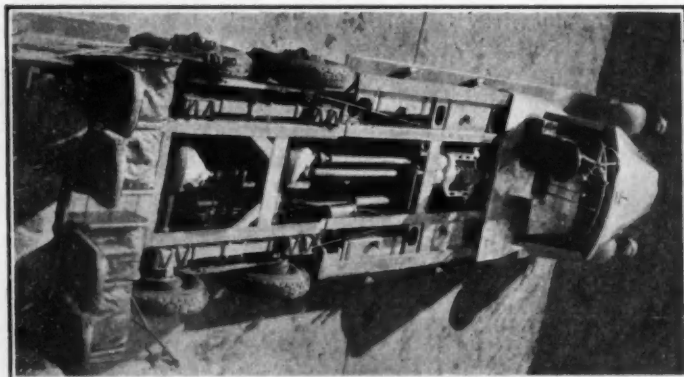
COMPLETE SIX-WHEEL CHASSIS ASSEMBLY
